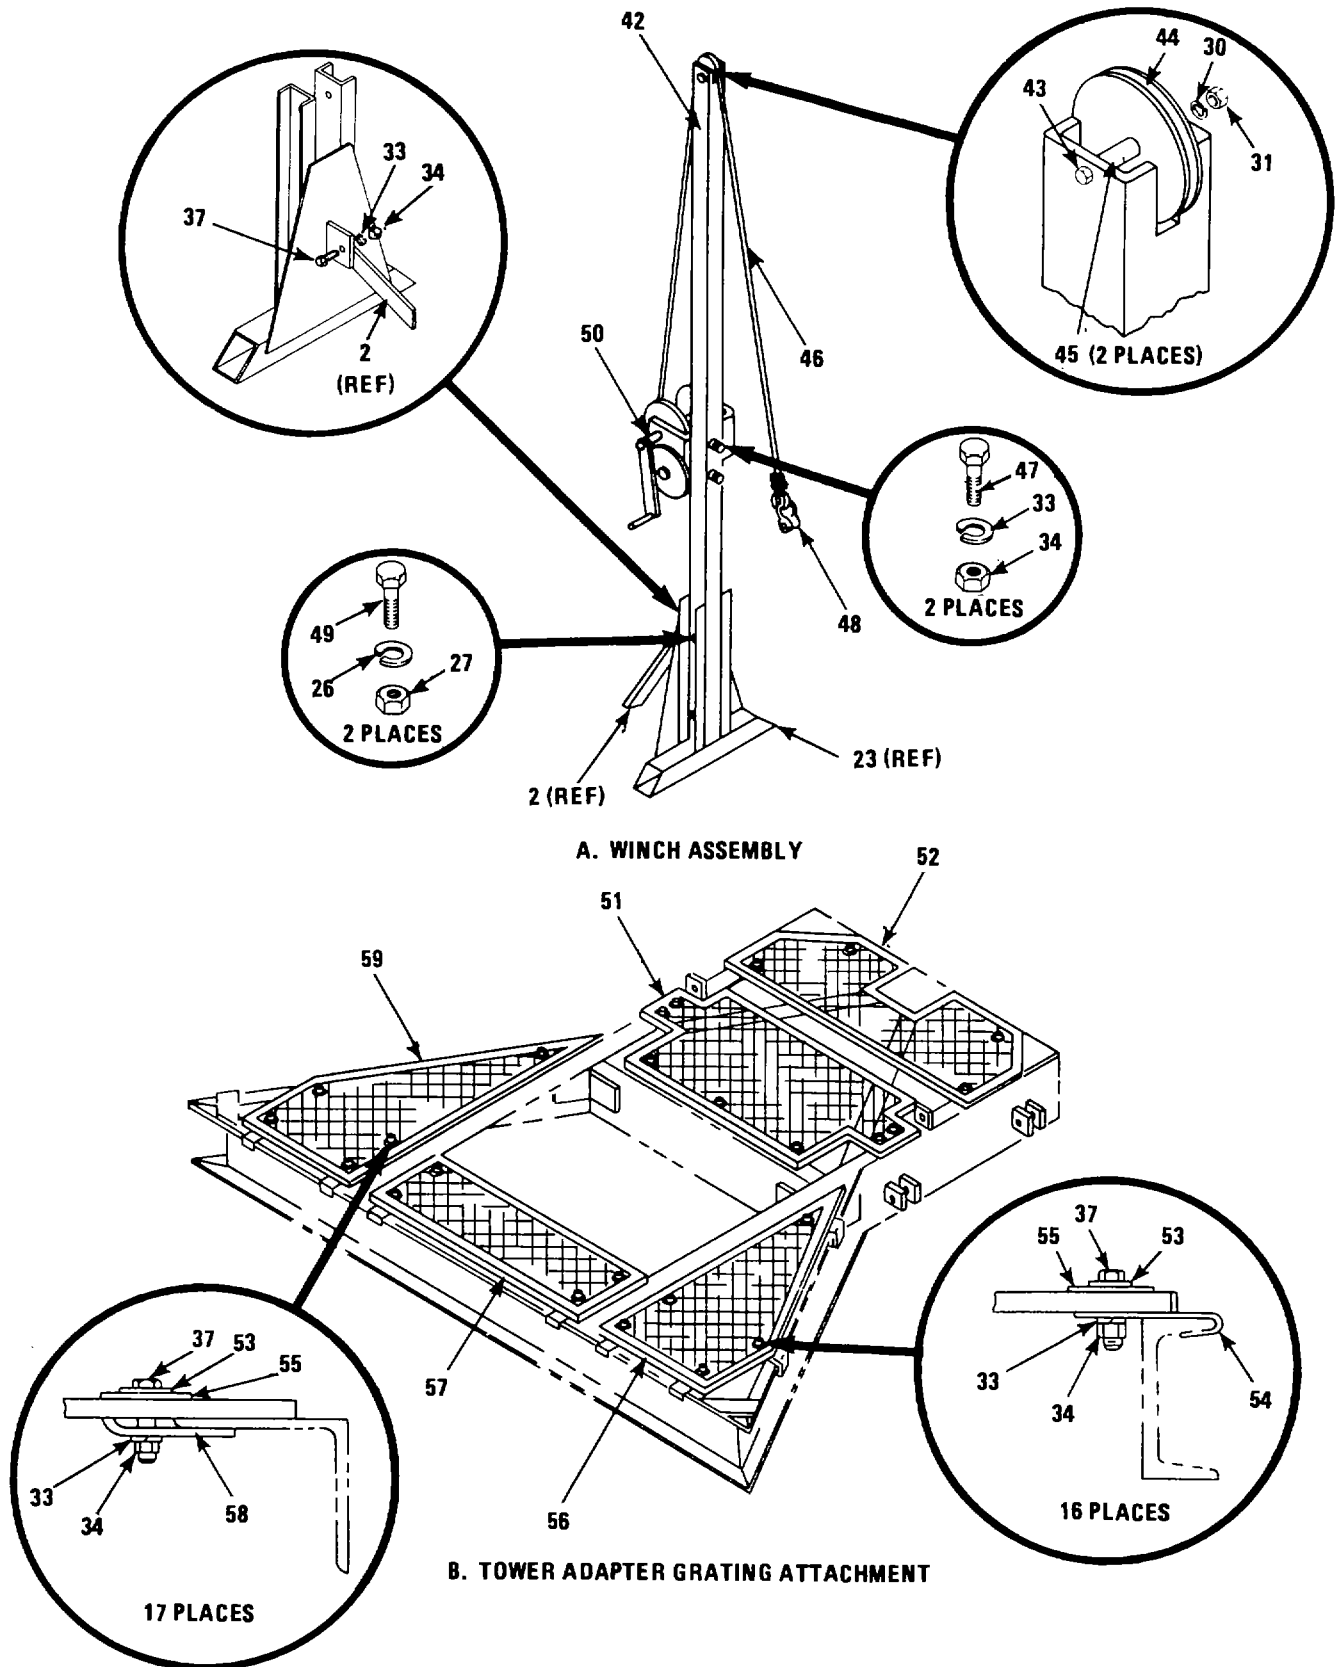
Tower Adapter Installation (Sheet 4 of 4)
